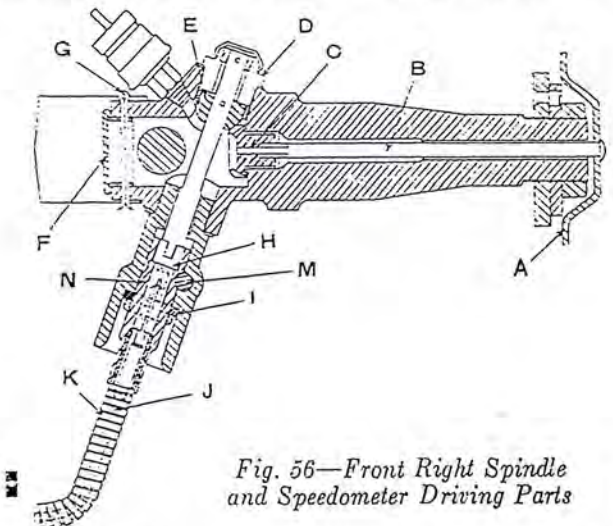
Front Right Spindle and Speedometer Driving Parts
